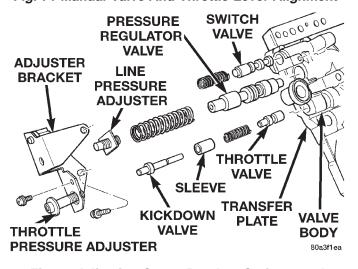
Adjusting Screw Bracket, Springs, and Valves
